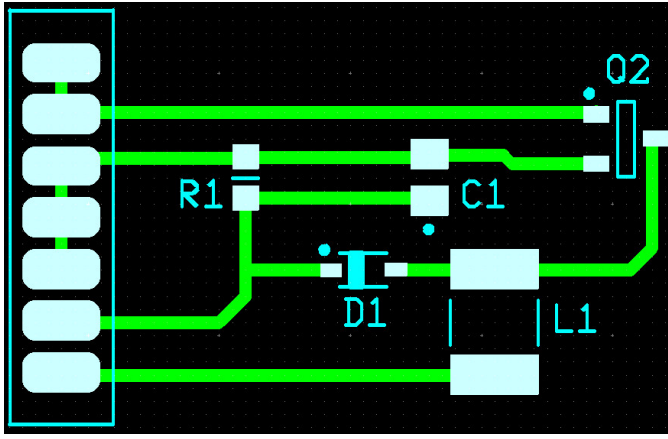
Picture of the layout of the components on the PCB. R1-resistor, D1-diode, C1-capacitor, L1-inductor, Q2-mosfet.
